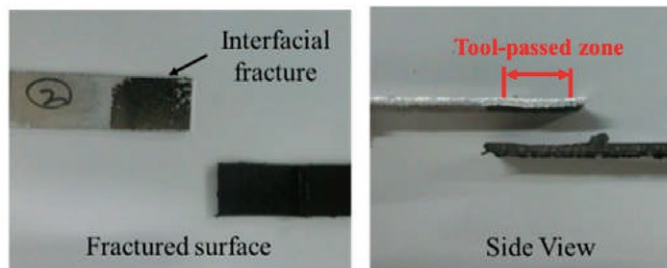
Fractured surfaces and side views of tool rotation 2400rpm, joining speed 400mm/min, broken part appearance.
